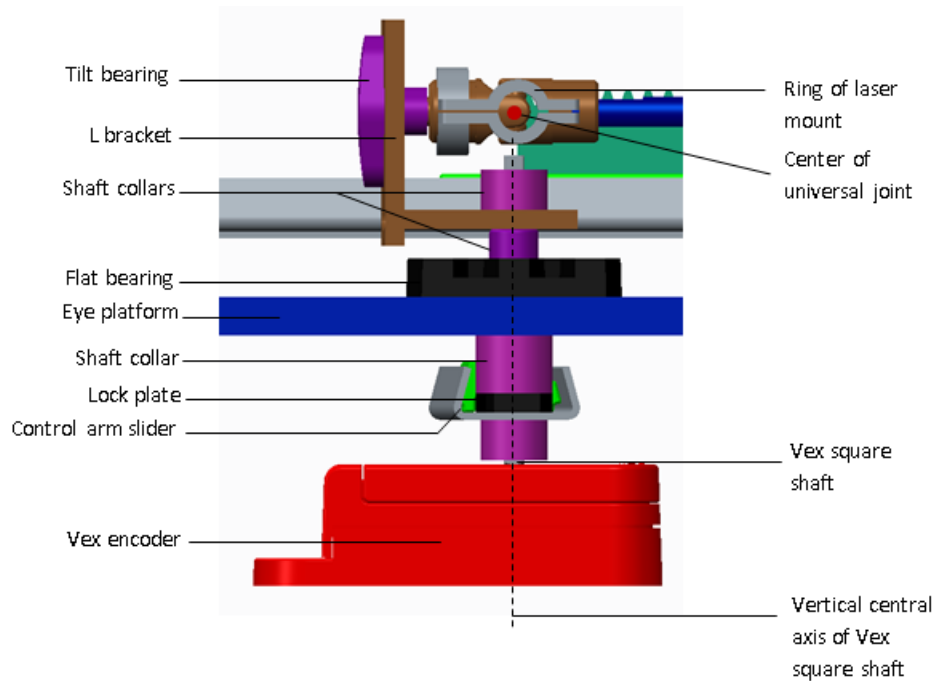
Detailed Front View of L-Bracket Assembly to the Eye Platform, Universal joint and Control Arm Slider
